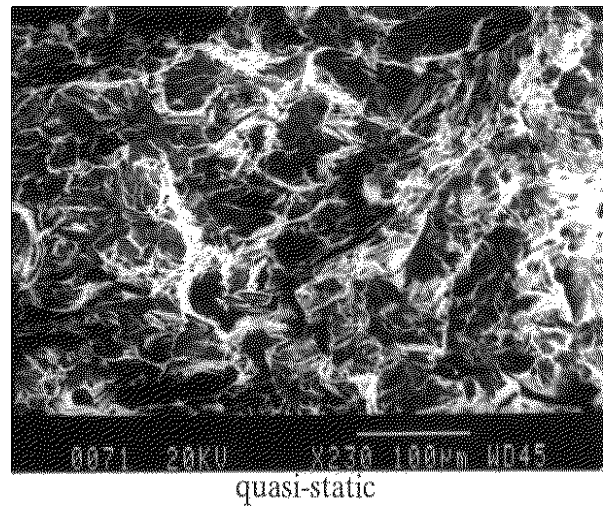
Fracture surface of specimen with 1.5 mm notch radius.
